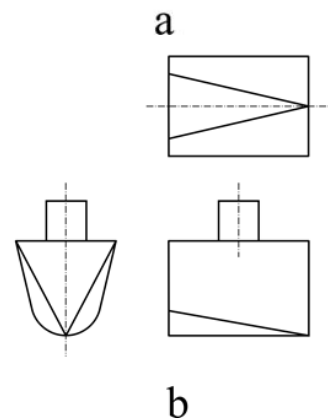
Tool for the Güth bending test: a) bending tool and b) scheme of the bending punch.
